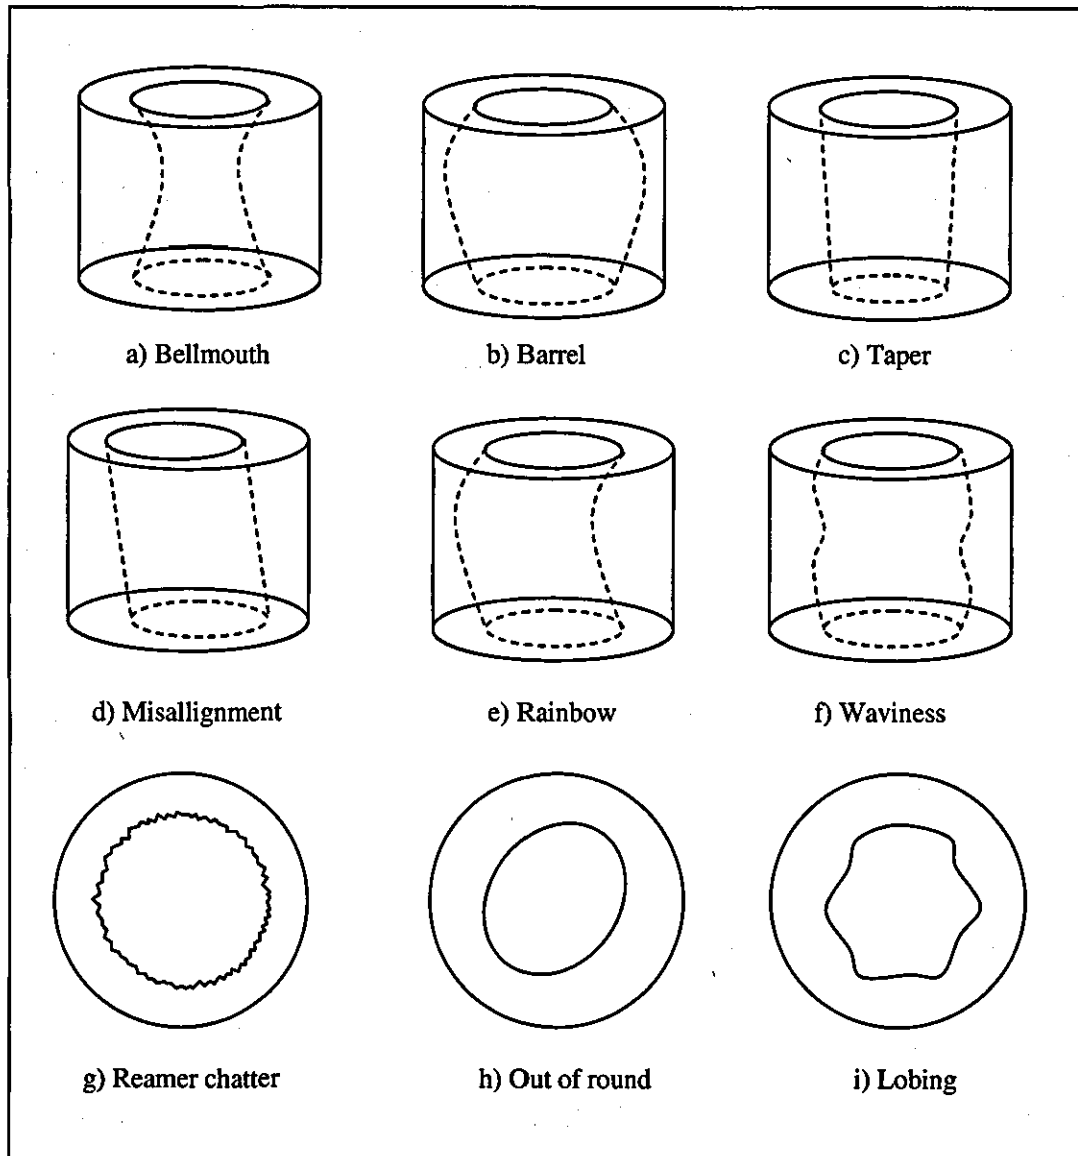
Geometrical imperfections of the cylinder caused by machining processes
